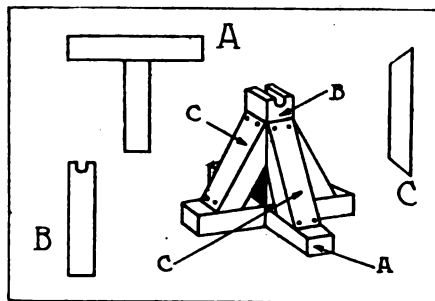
Easily Made Jack for Supporting Car; A, Formation of Upright and Horizontal Pieces; B, Groove Cut in Top of Upright Member; C, Angle Ends of Supports.
